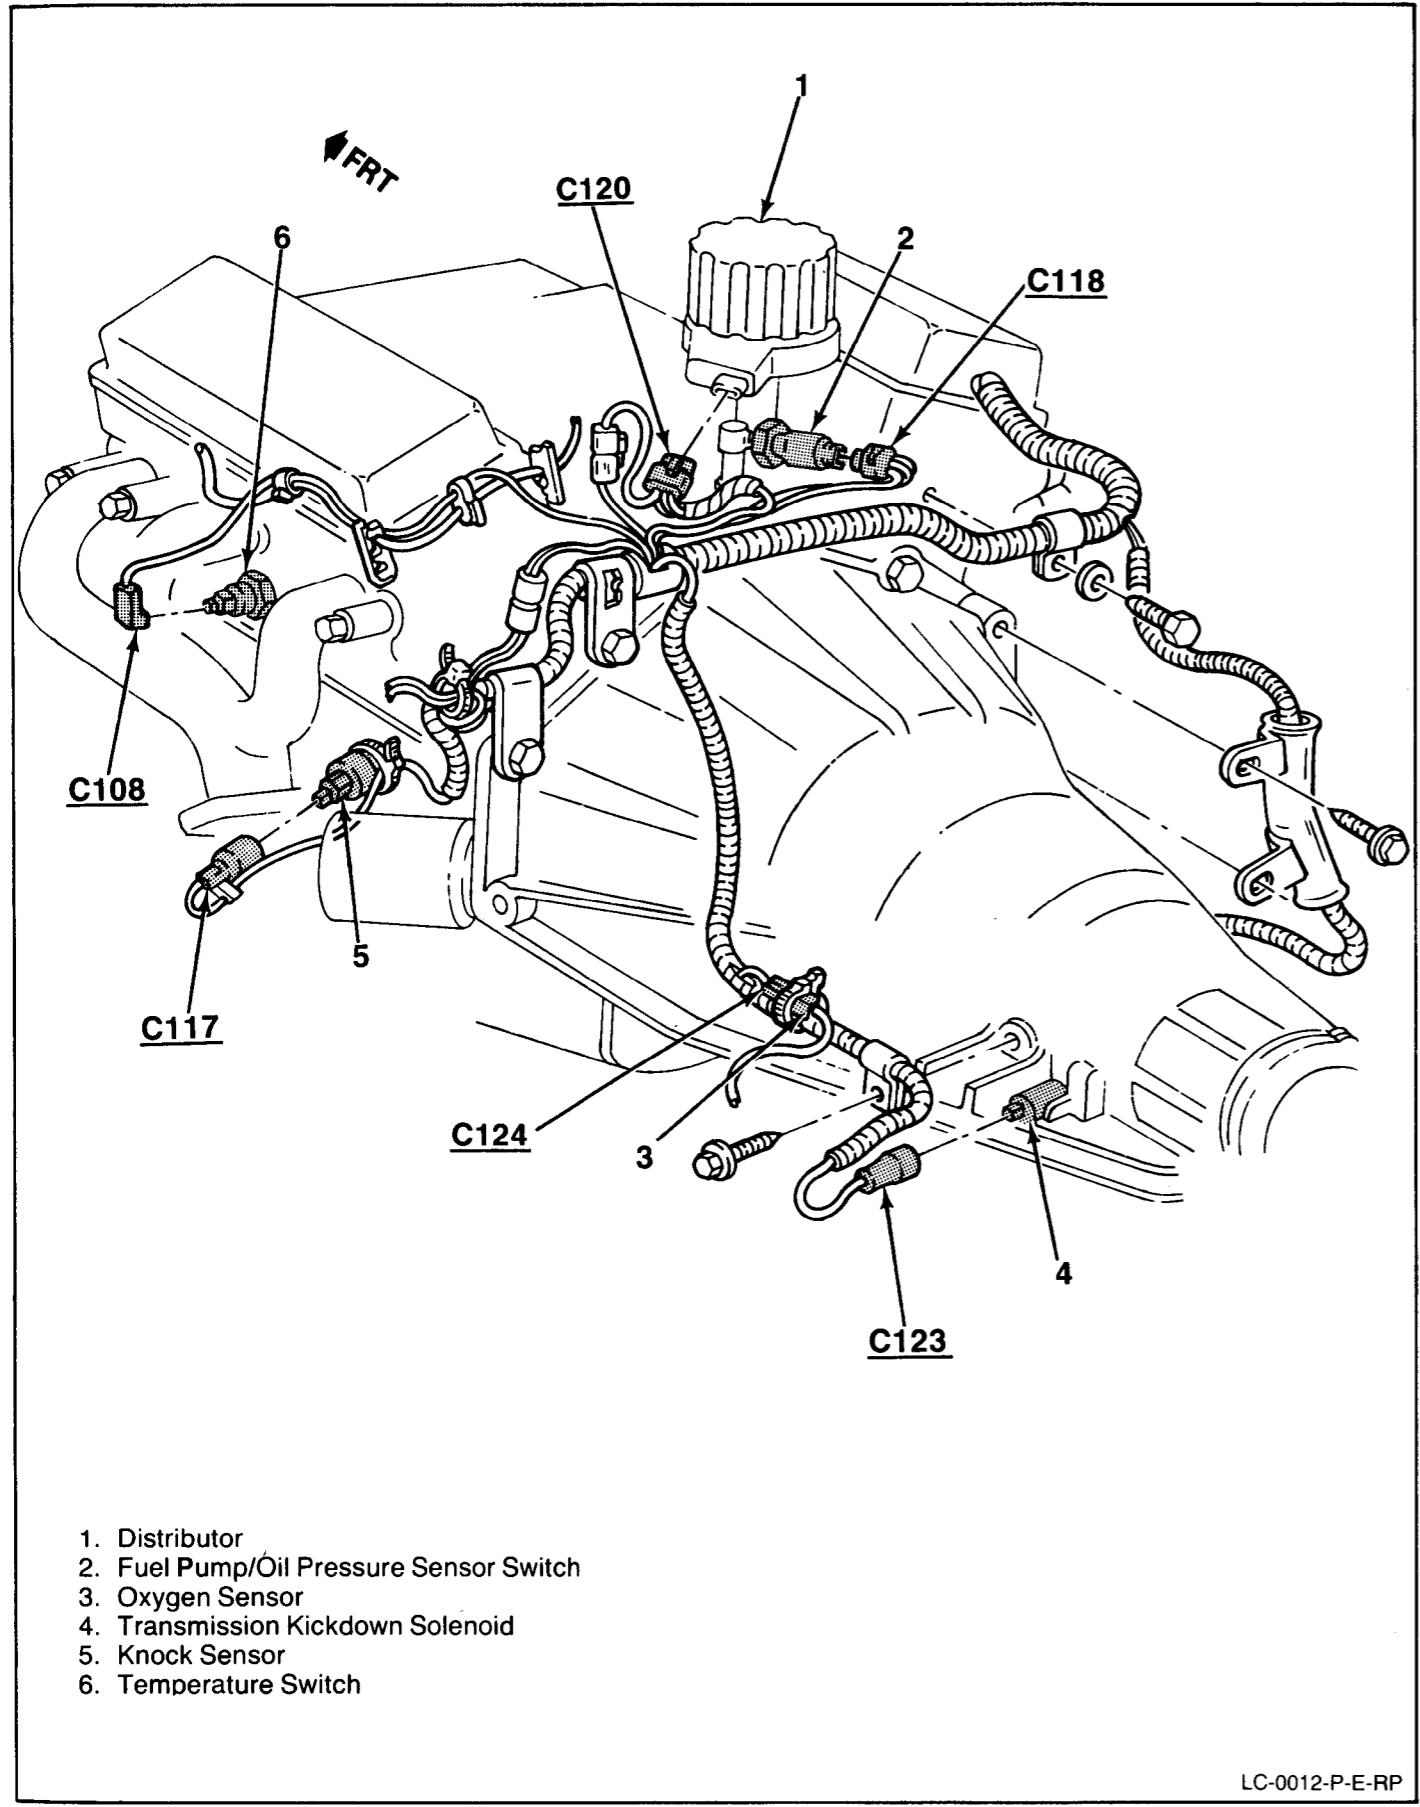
Engine Wiring Harness, LH Side (RPO LB4 w/P42)
